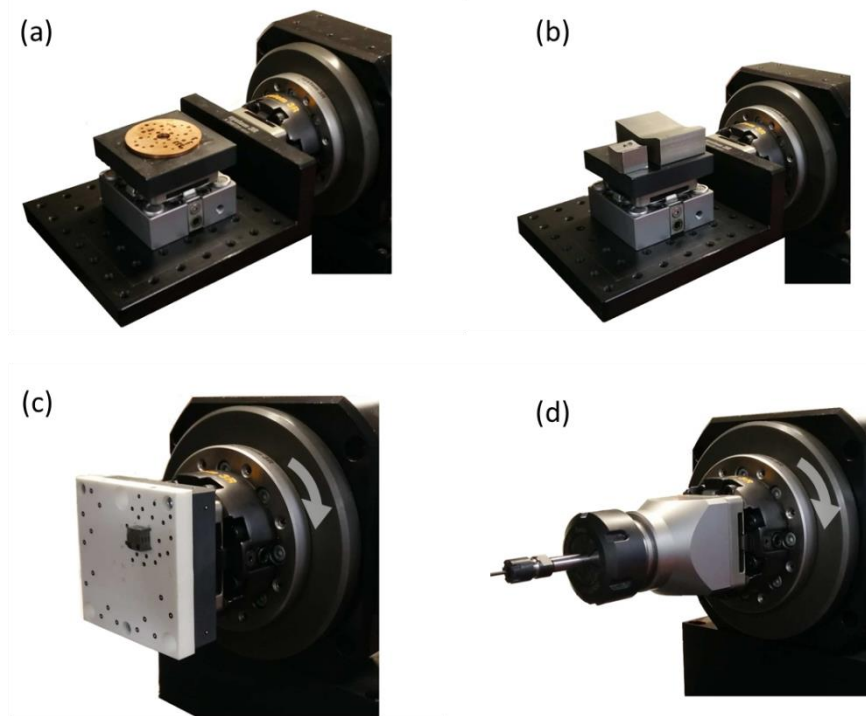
Workpiece holding extensions to realize: (a) one-side processing of a single part; (b) one-side processing of an array of parts; (c) multi-side processing of a single part; (d) machining of axis symmetric parts
